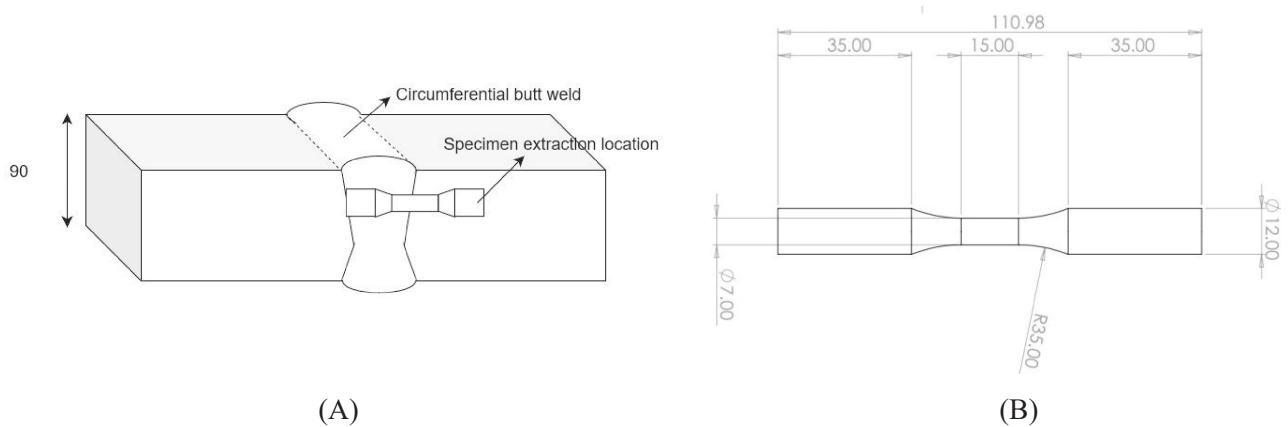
Schematic showing (A) extraction location for preparing cross-weld specimens and (B) specimen geometry (all dimensions are in millimeters)
